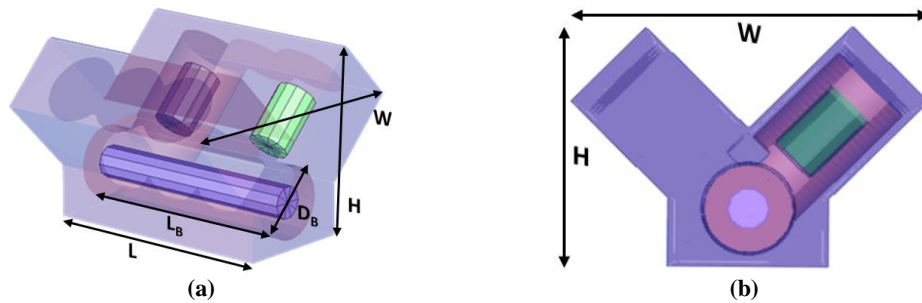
Enlarged (a) 3D and (b) 2D view of engine body with dimensions
